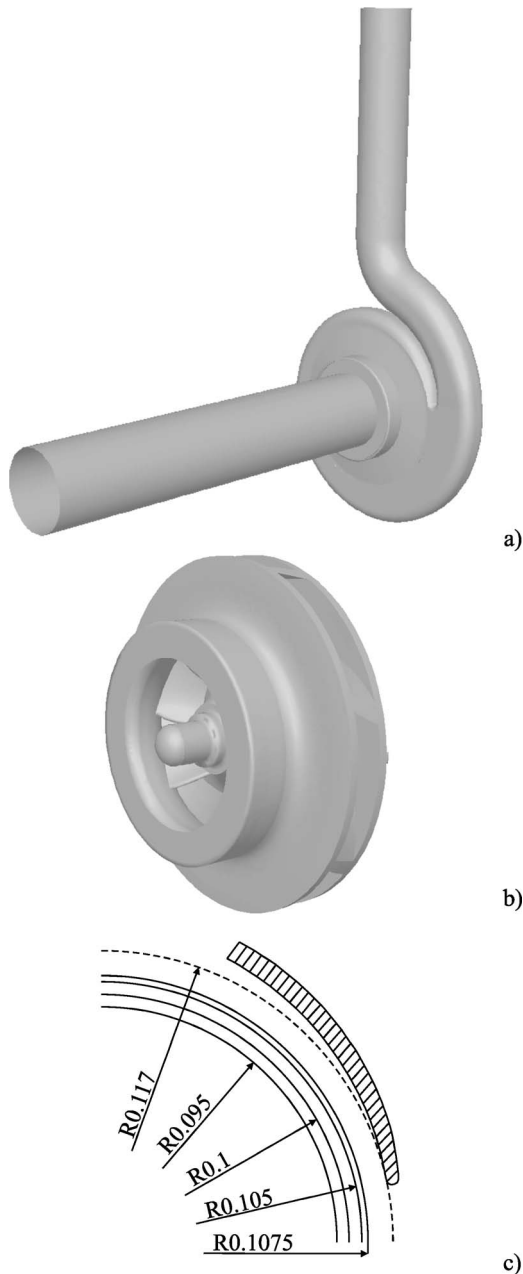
Pump numerical model. (a) Pump with inlet and outlet ducts. (b) Impeller surface. (c) Impeller-tongue gap for the impeller cutbacks tested.
